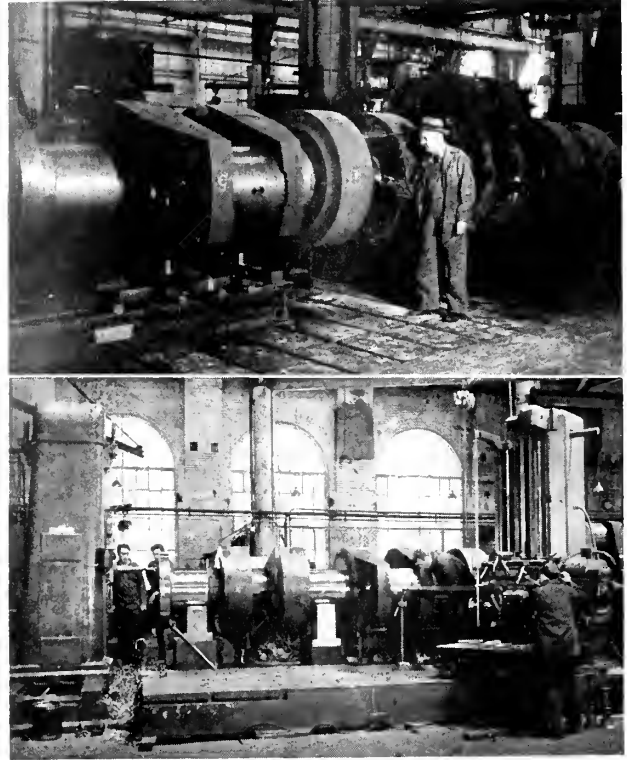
, above: Drilling and spot-facing coupling bolt holes was accomplished on a #340 horizontal mill, while oil holes were being drilled simultaneously by portable horizontal mill. Such twin machining operation is typical of Bethlehem methods expediting ship repair work.
